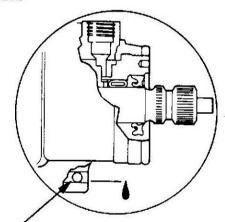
Revised Steering Gear Leak Diagnosis and Corrective Action (View A)
